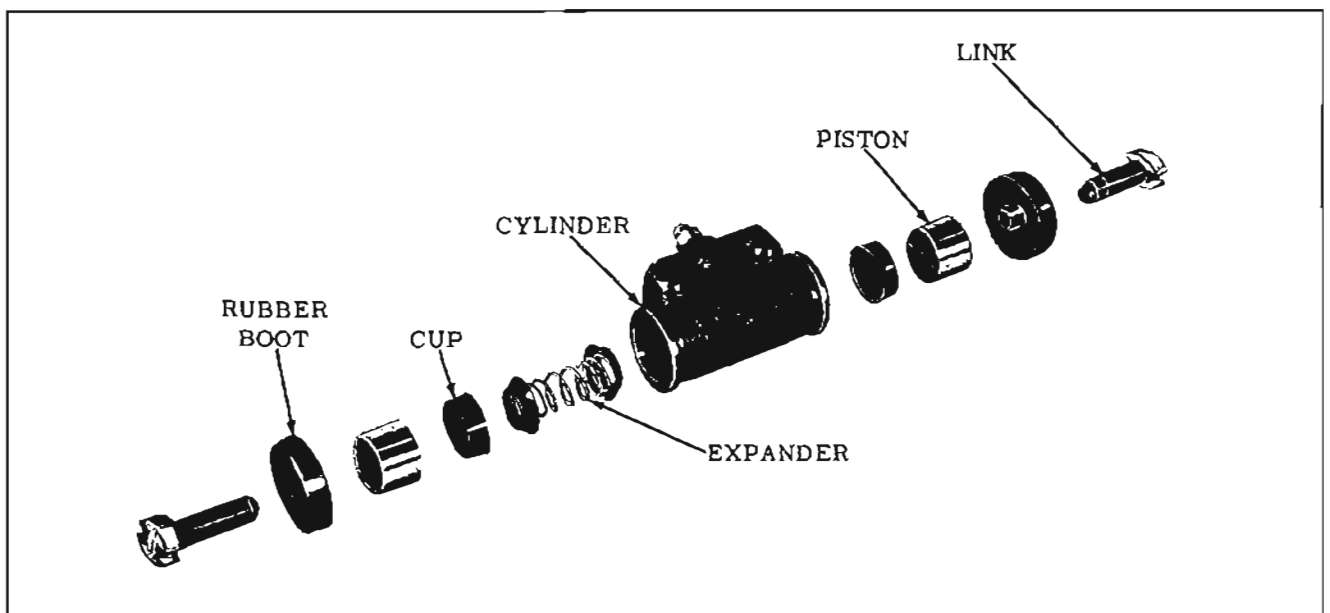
Wheel Cylinder (30, 31, 32 & 33 Series)
